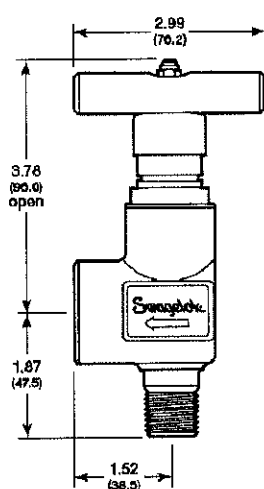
The needle valve for the fuel injection in the explosion vessel (Swagelok, 2009).
